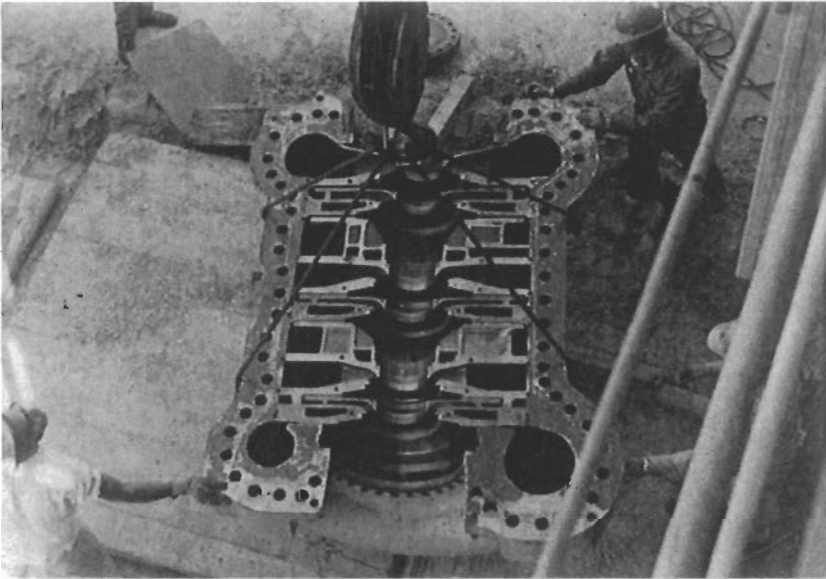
Installing hydraulic equipment to remove the compressor coupling half. (1 hour into the job.)
